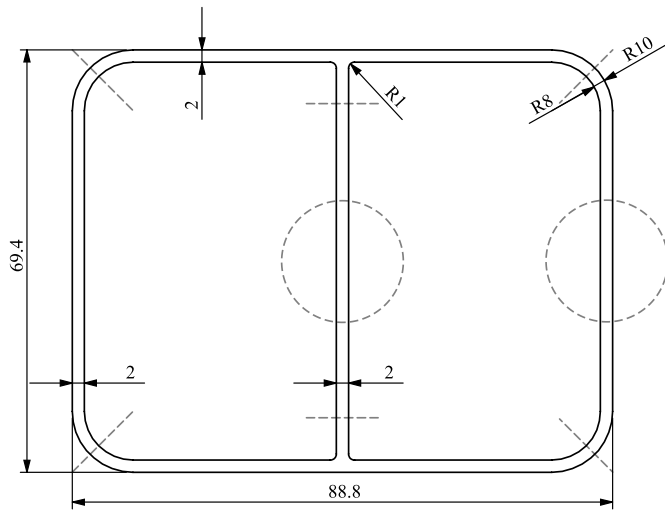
Nominal cross-sectional geometry of the profiles. Dimensions are in mm. The grey dashed circles indicate where on the cross section the tensile test specimens were taken from. The grey dashed lines show the locations of the seam welds.
